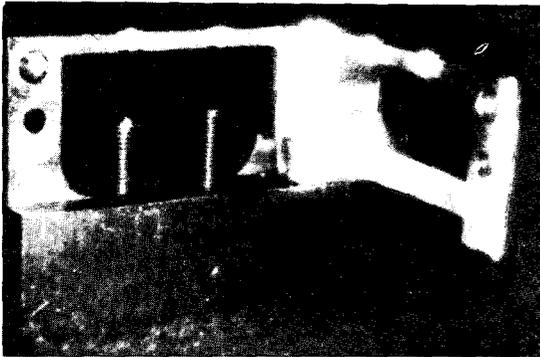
Stainless steel mold for bonding composite resin to porcelain specimen.
